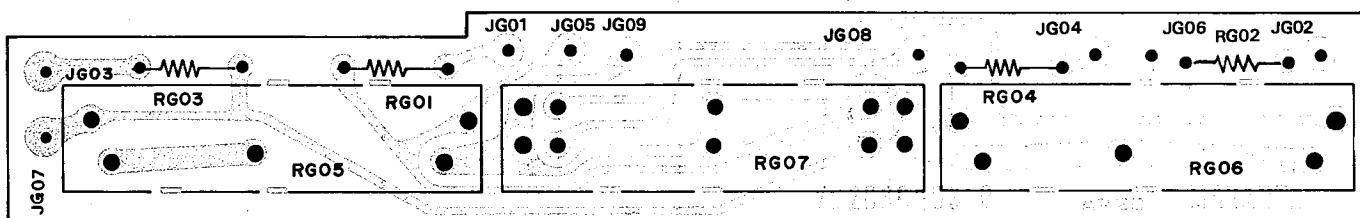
Balance Control Unit Assembly PG01 Component Locations
